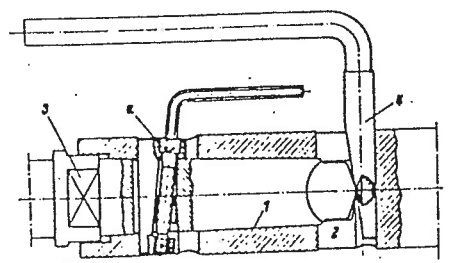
Patented spindle nose of a horizontal boring machine (Collet & Engelhard, Offenbach, Germany).
